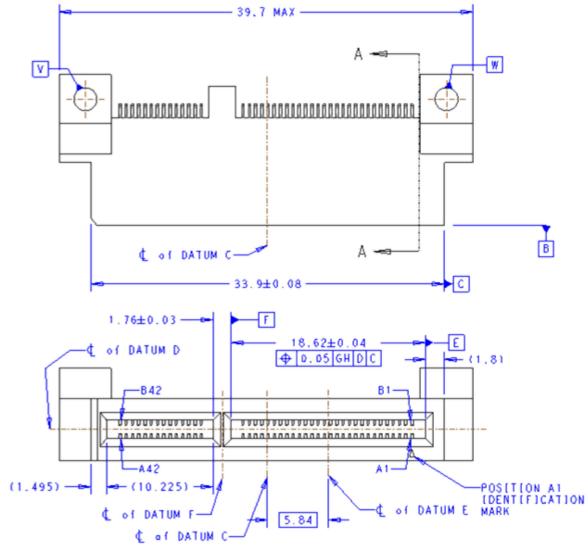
2C STRADDLE MOUNT CONNECTOR DIMENSIONS - FRONT VIEW (MM)
